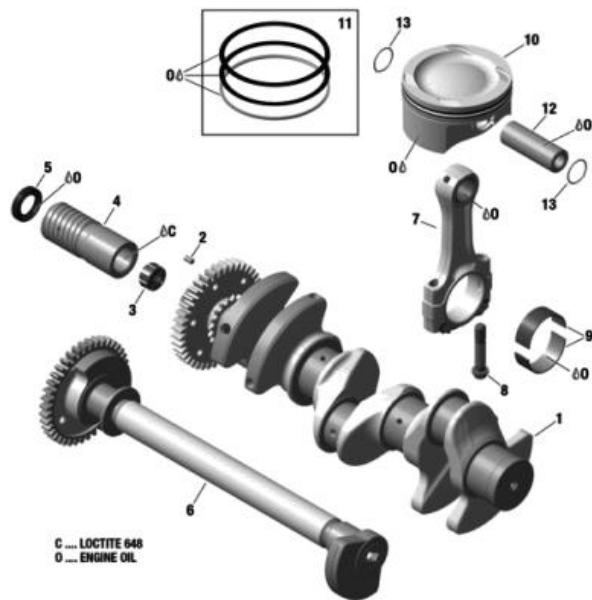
Crank Mechanism for 3-cylinder engine with balance shaft.
